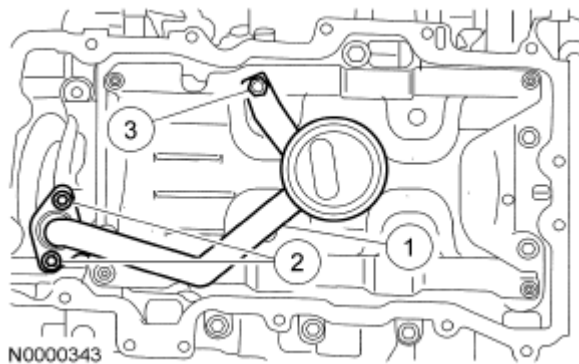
Identifying Oil Pump Screen, Pickup Tube & Bolts
